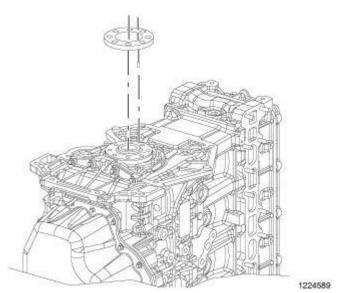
Crankshaft Sensor Tone Wheel Courtesy of CHRYSLER LLC
